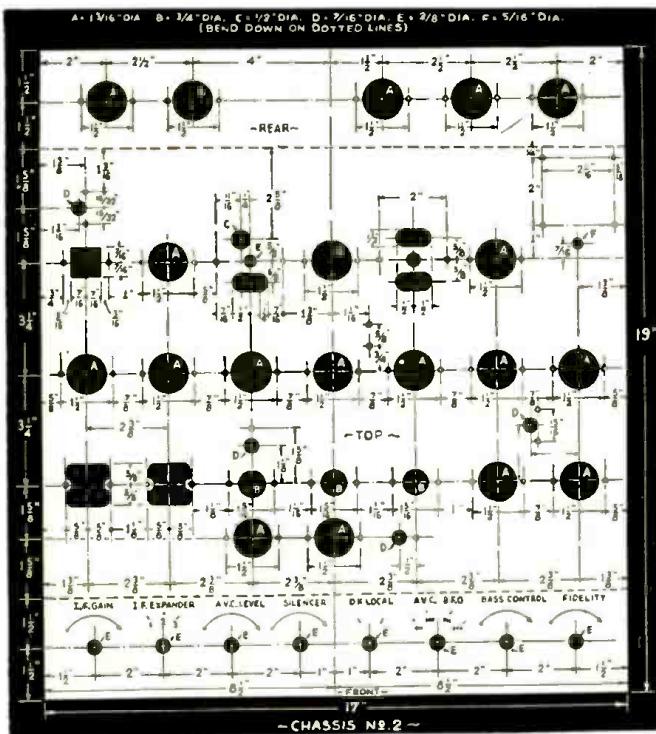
Complete physical specifications for making the base of Chassis No. 2.
